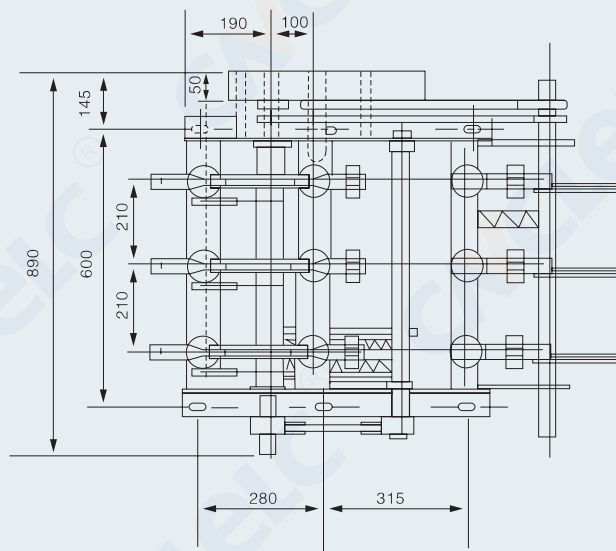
Installation dimension diagram of FN7-12DRAC combined load switch
